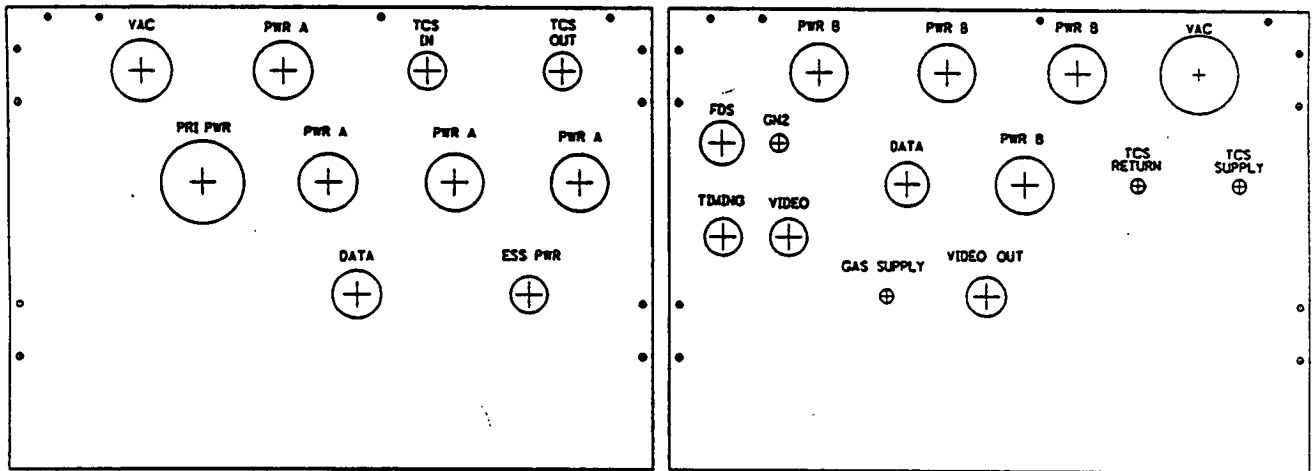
Reduced Service Core Rack Interface Panel Layout
